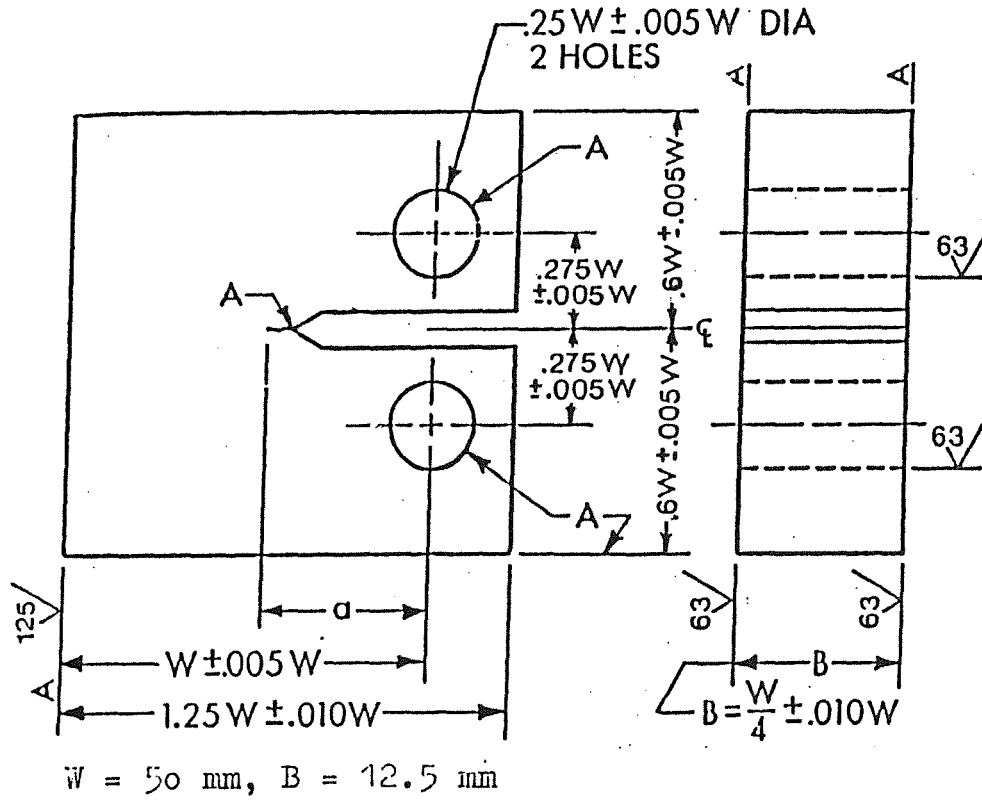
Fatigue crack growth CT specimen standard dimensions and tolerances
